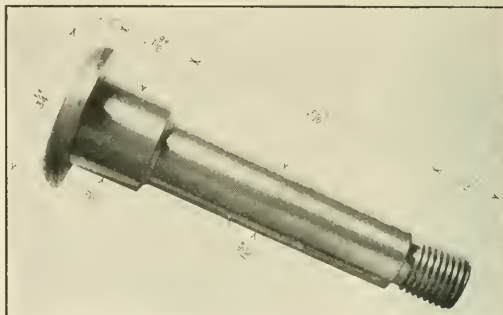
View Showing Dimensions and Finish of Saddle Pin
